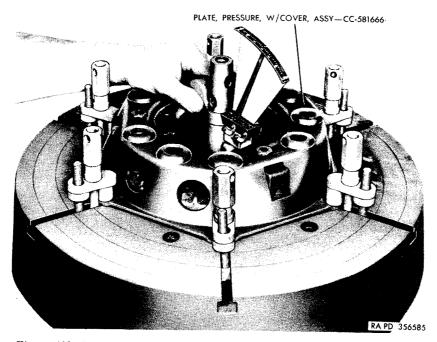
Checking release lever adjustment with clutch rebuilder 41-C-2480
